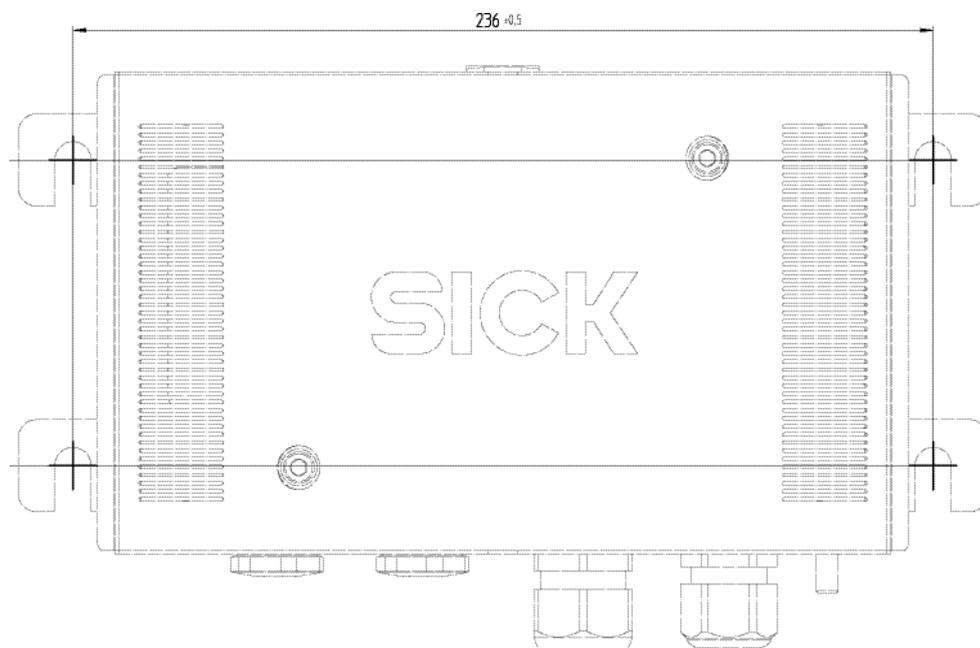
Dimensions TAD control unit (all units of measurement in mm)
